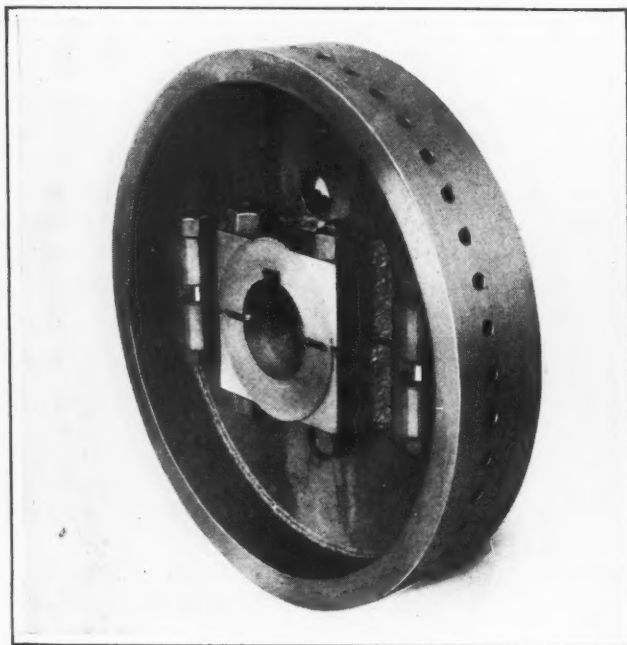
Example Illustrating How Flywheels and Similar Parts Could be Fabricated
